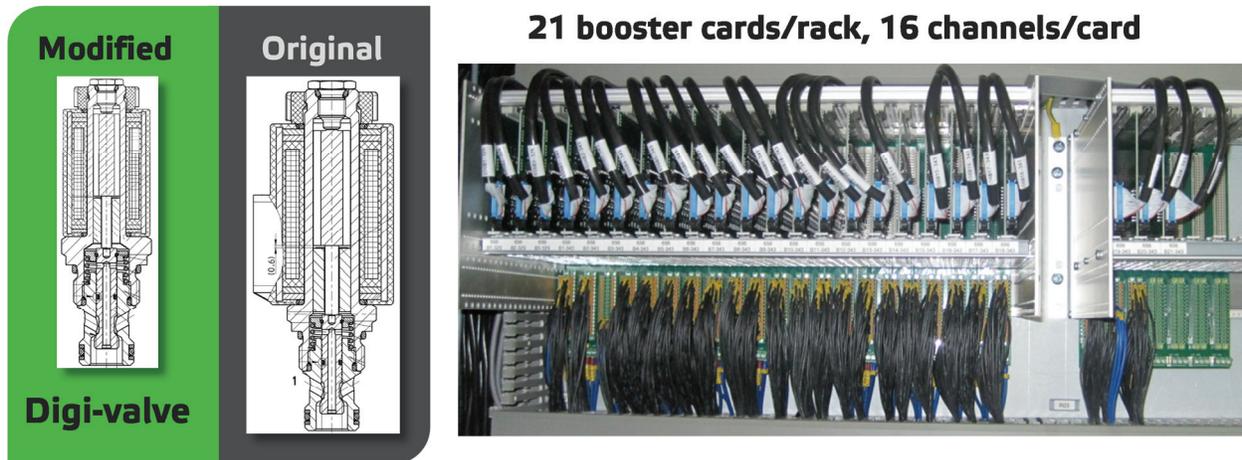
Valmet worked with a valve manufacturer to reduce the size and speed up poppet valves, and designed a space-saving booster card.
